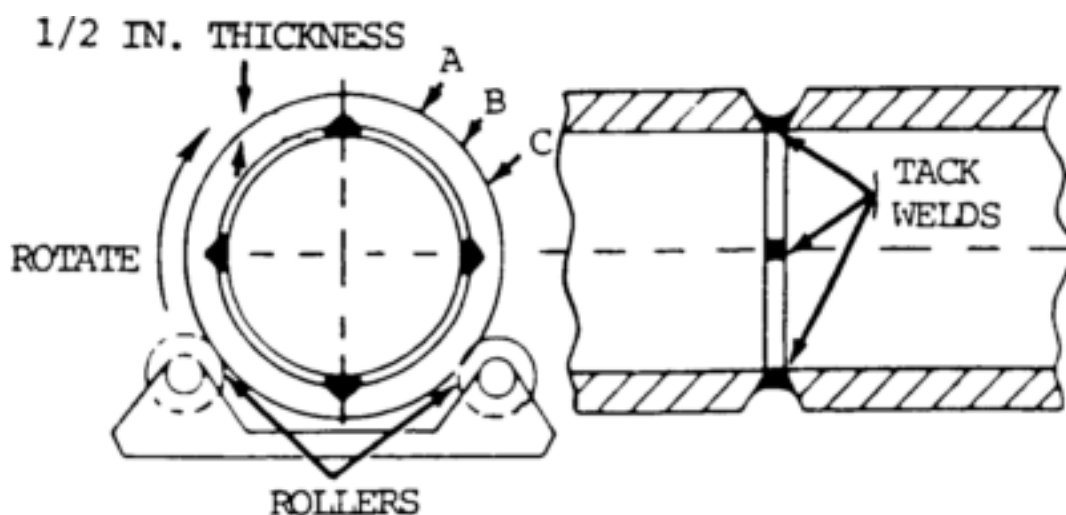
Diagram of tack welded pipe on rollers.
